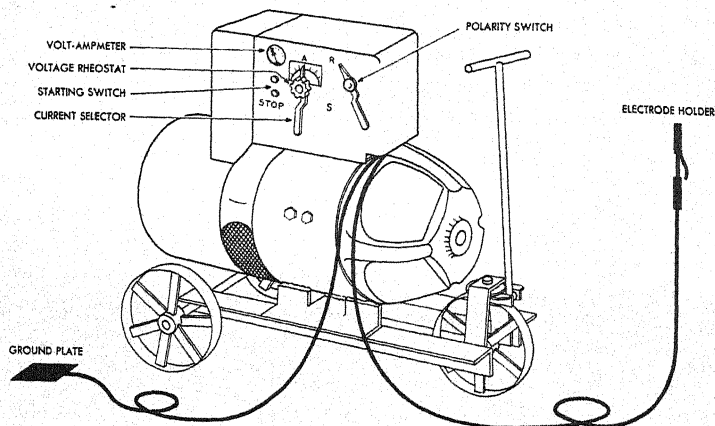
Dual-control direct current, motor generator, arc-welding machine.
